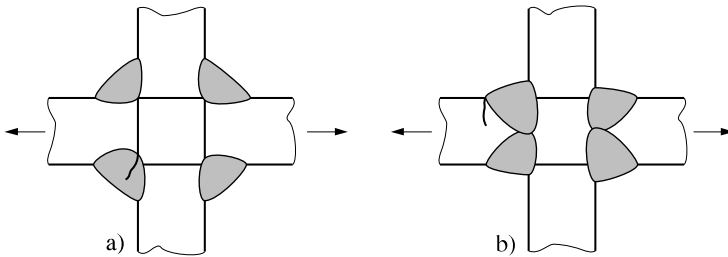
Fatigue cracking of a load-carrying fillet weld
